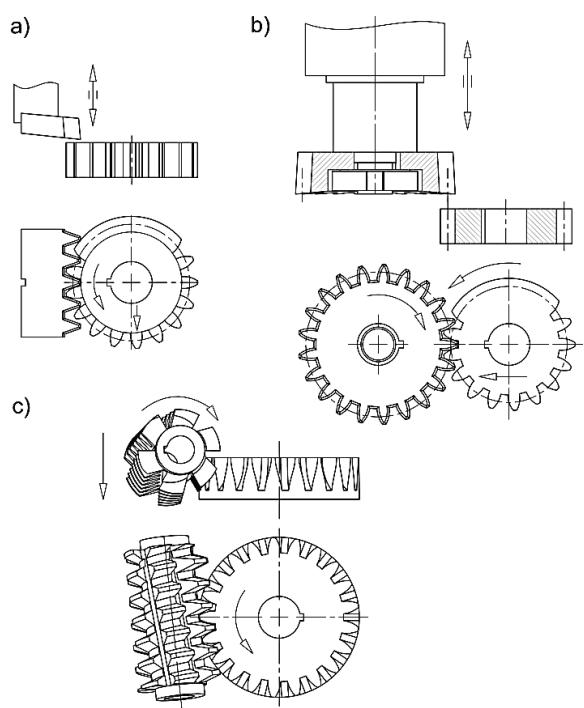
Envelope machining of gear wheel toothings by: a) the Fellows gear shaving method, b) the MAAG gear shaving method, c) hobbing
